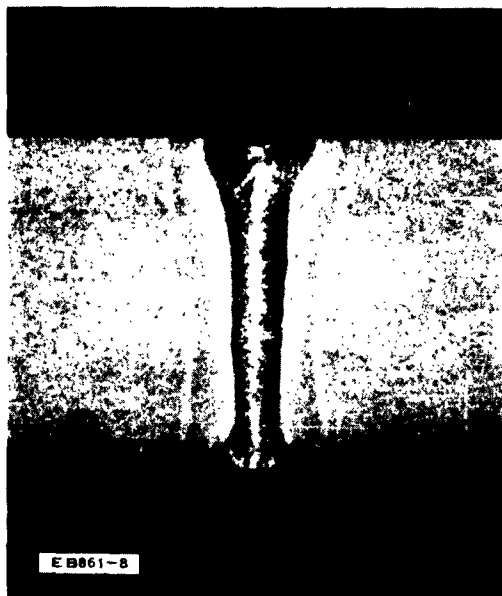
Trial Weld Cross-section; X20; 0.090-Inch D6AC; 130KV, 15 ma, 60 ipm
